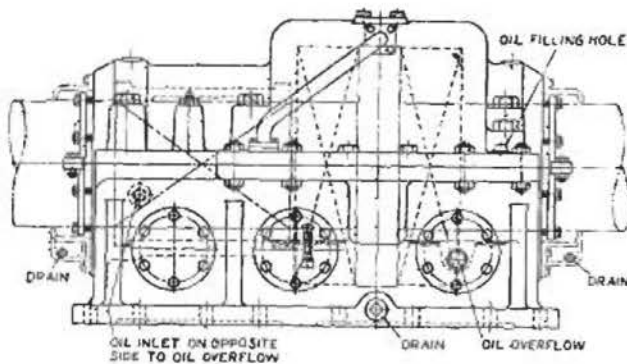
Style KH combined horizontal mounting for journal and double thrust bearing. Collar is integral with shaft. Lubrication is automatic. Base flange is provided. STANDARDIZED: See Bulletin G-1.
